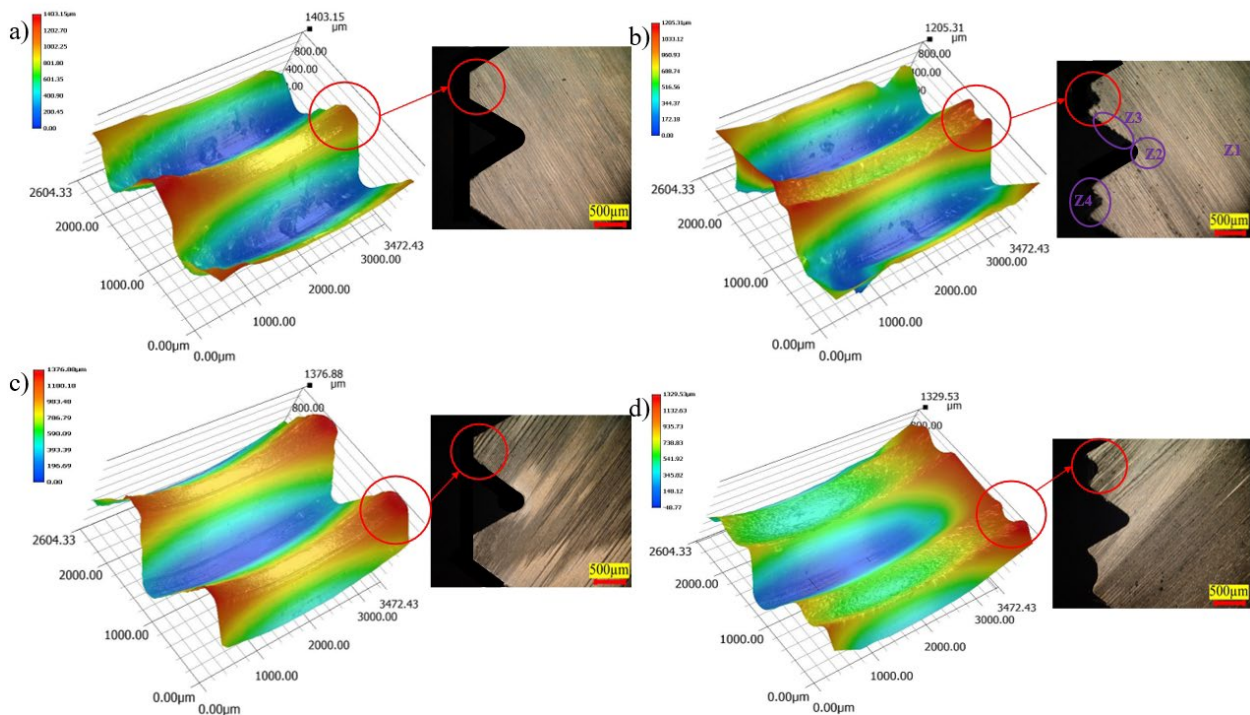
The formed threads; Ext. CW511L a) cutting, b) forming, F+Ann. CW511L c) cutting, d) forming.
